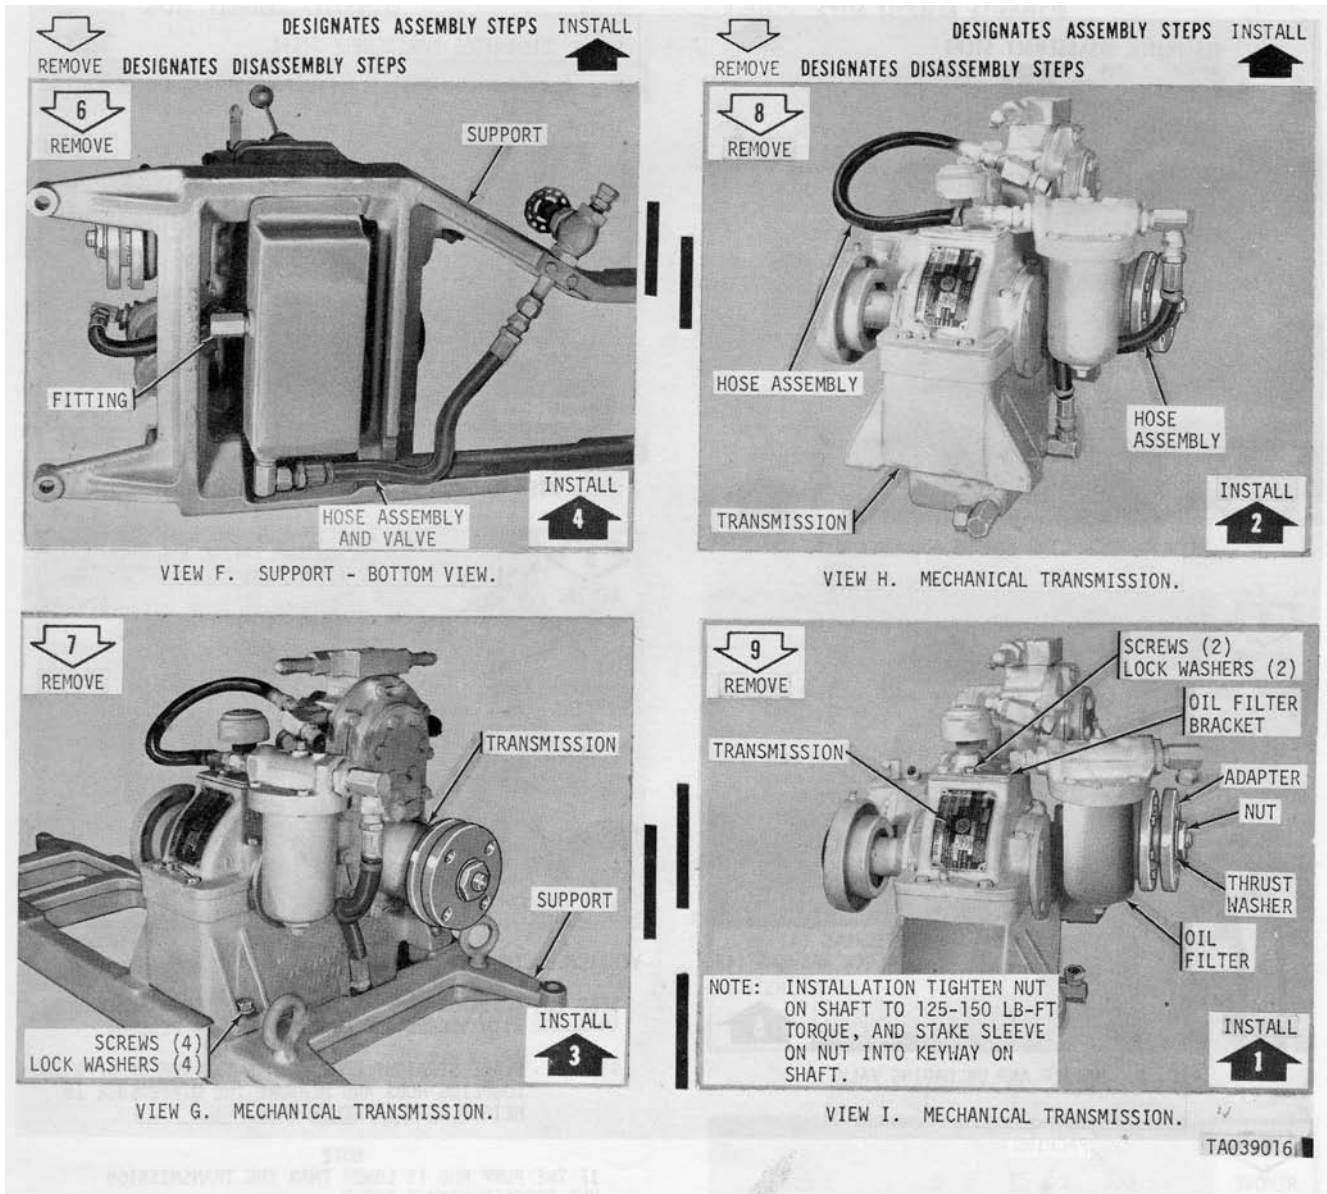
Disassembly of mechanical transmission and main hydraulic pump assembly into subassemblies (Sheet 2 of 2).
